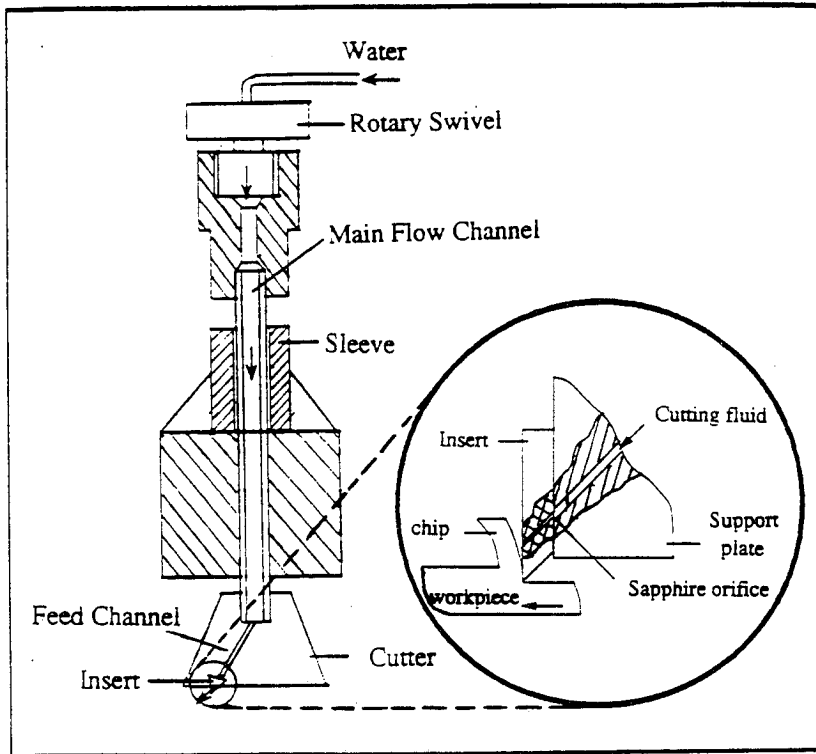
Design of High Pressure Waterjet Coolant/Lubricant System for Milling
